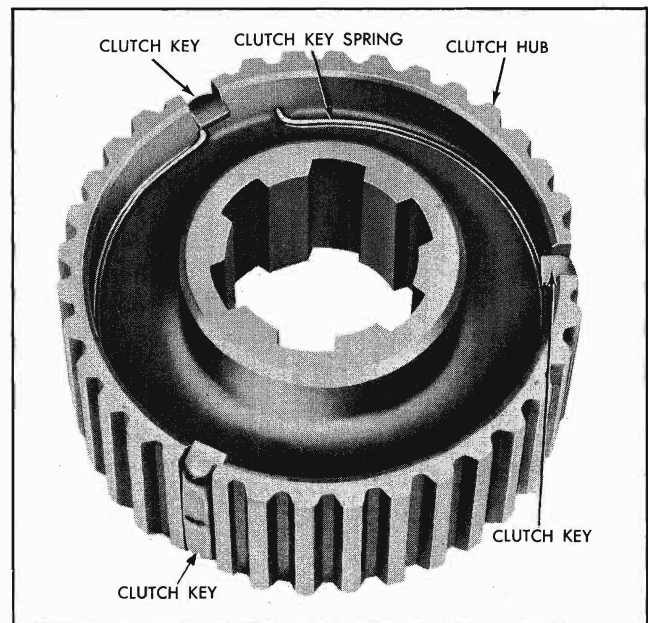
A-19 Clutch Keys and Synchronizer Springs Installed in Clutch Hub
